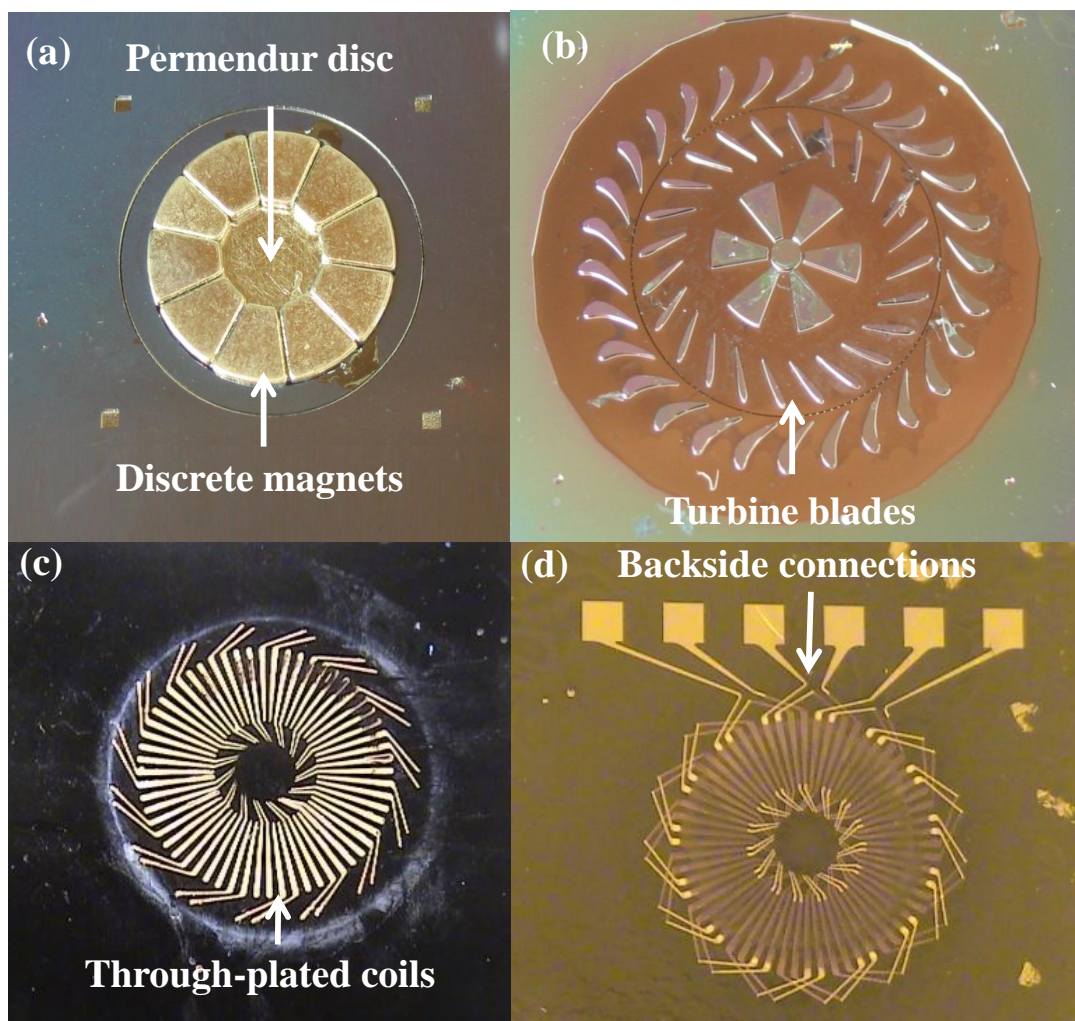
Pictures of a fabricated micro-turbo-generator, rotor (a) top and (b) bottom views, and stator (c) top and (d) bottom views.
